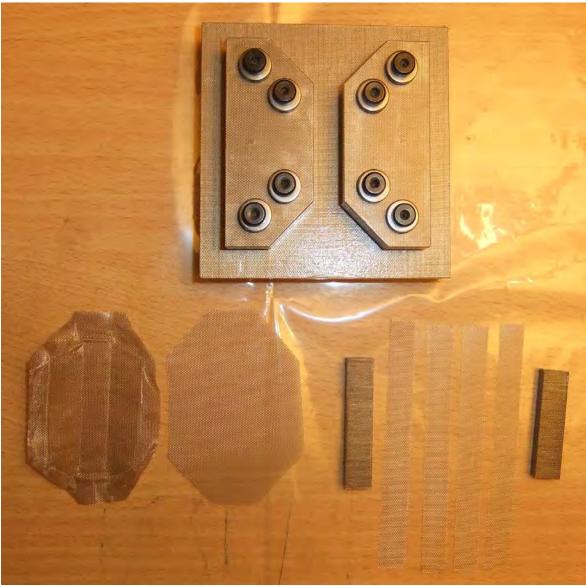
, Assembled Composite Lay Up Jig Top Down View
